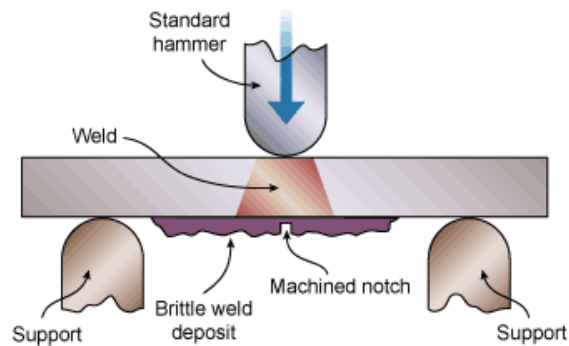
Drop Weight testing (DWT) of weld [119].
